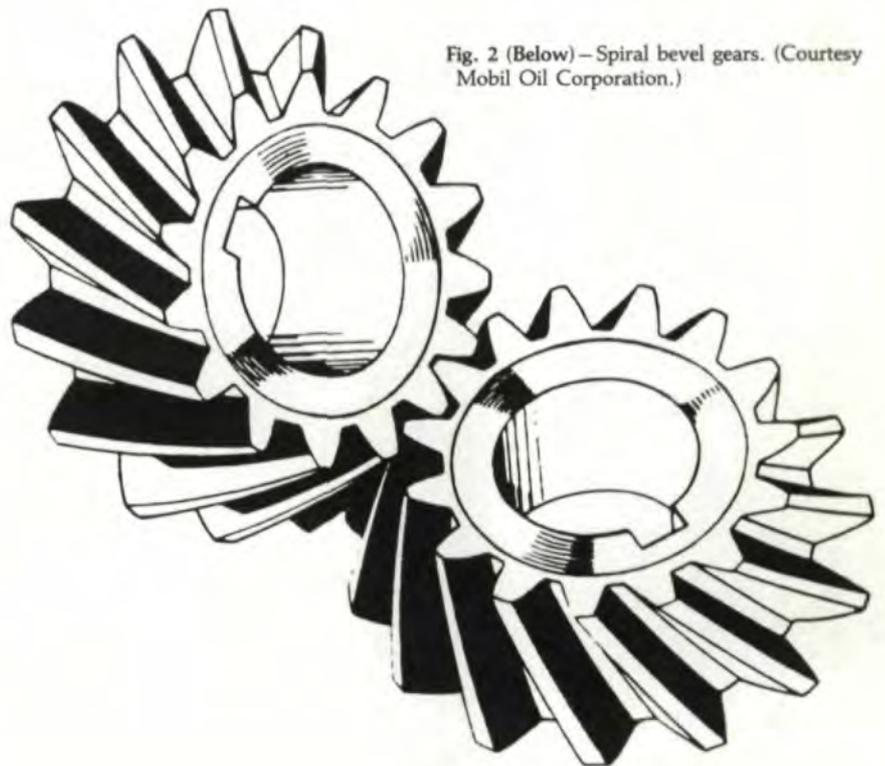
(Below) — Spiral bevel gears. (Courtesy Mobil Oil Corporation.)
